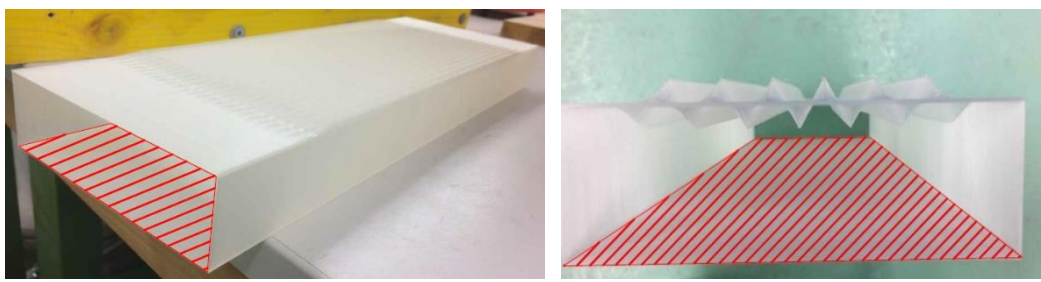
and 51 – On the left, Upper side to remove, view from the side; on the right, upper side to remove, view from the top
